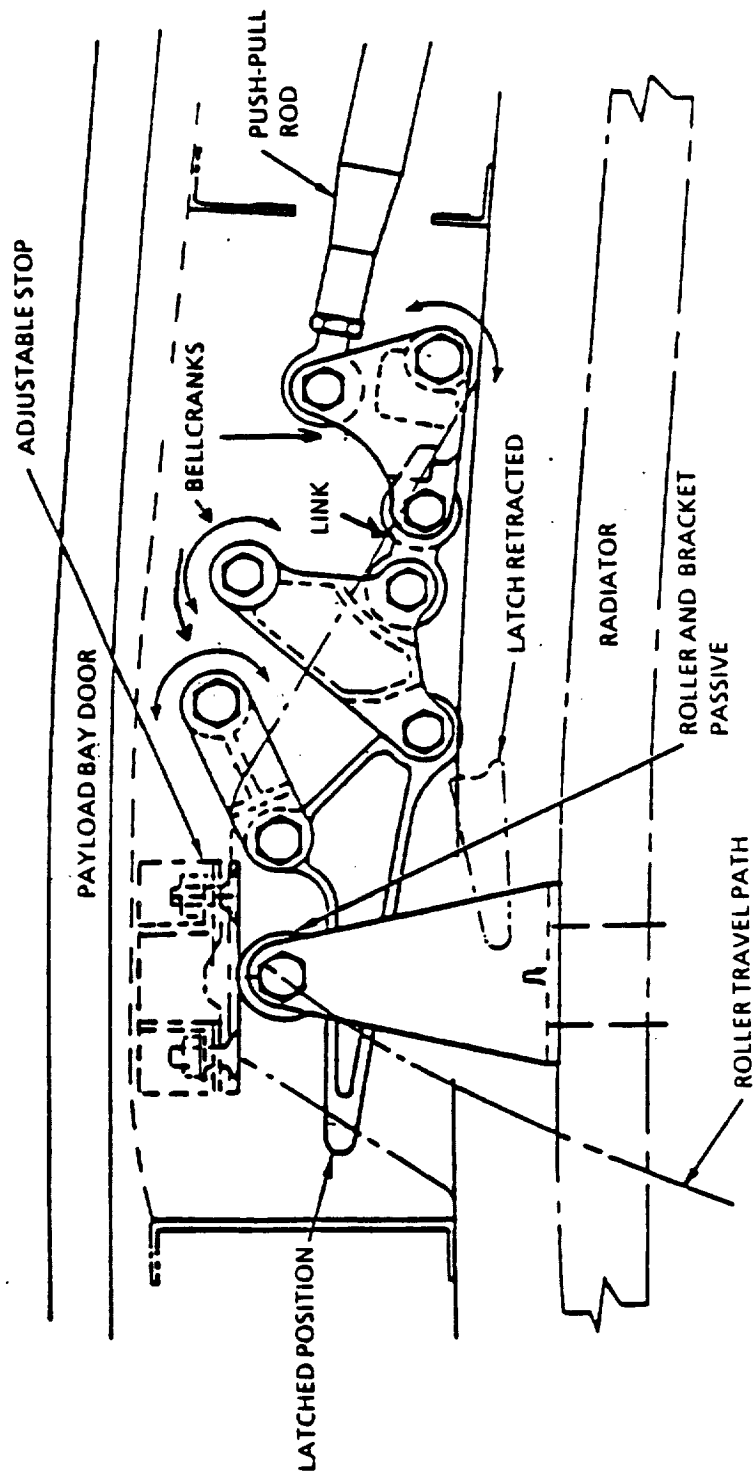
RADIATOR LATCH HOOK MECHANISM
